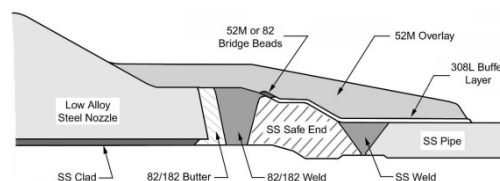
Cladding as butter layer and overlay in DM weld of cold leg to RPV nozzle
